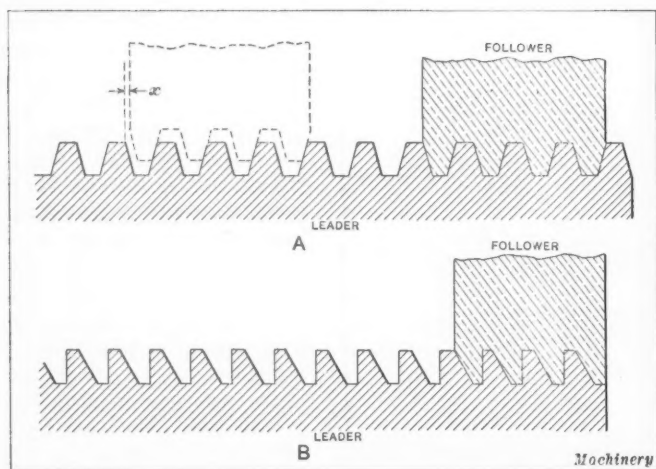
(A) Action of Follower when using Rigid Follower Arm while chasing Taper Threads. (B) Form of Leader Thread intended to prevent Loss of Pitch when chasing Taper Threads
